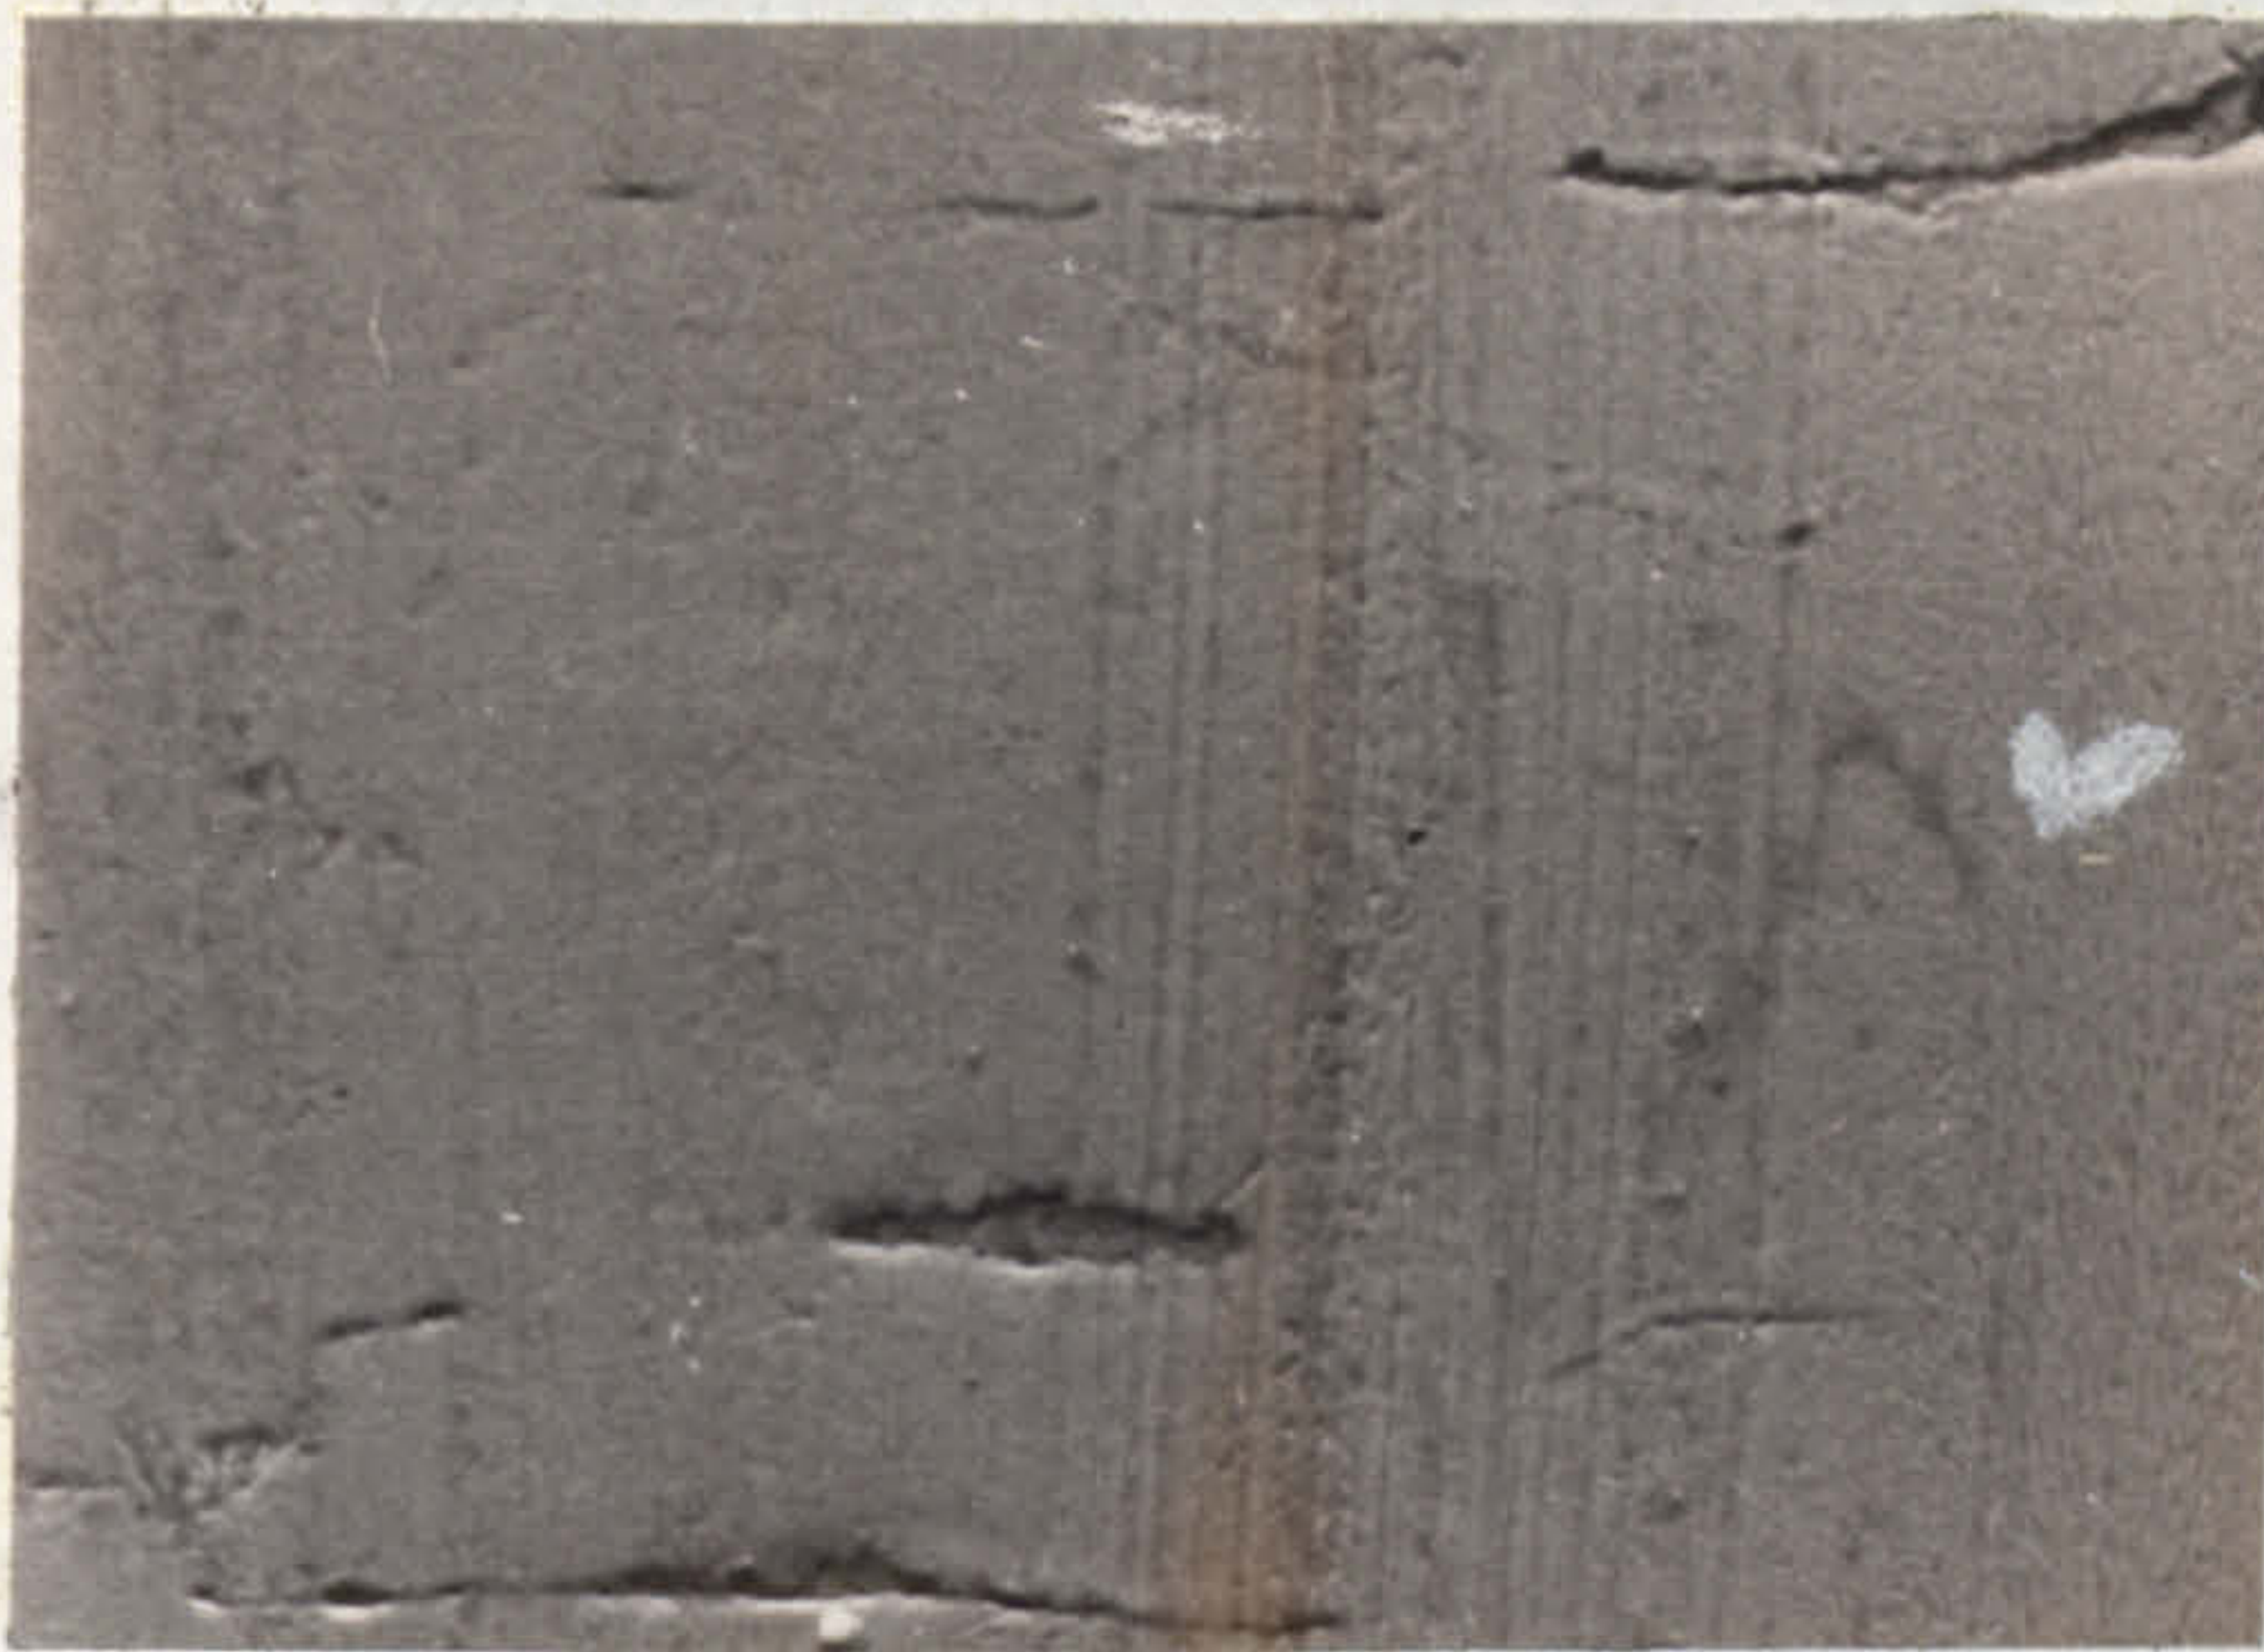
TEST 1A, CAM WEAR SURFACE,
